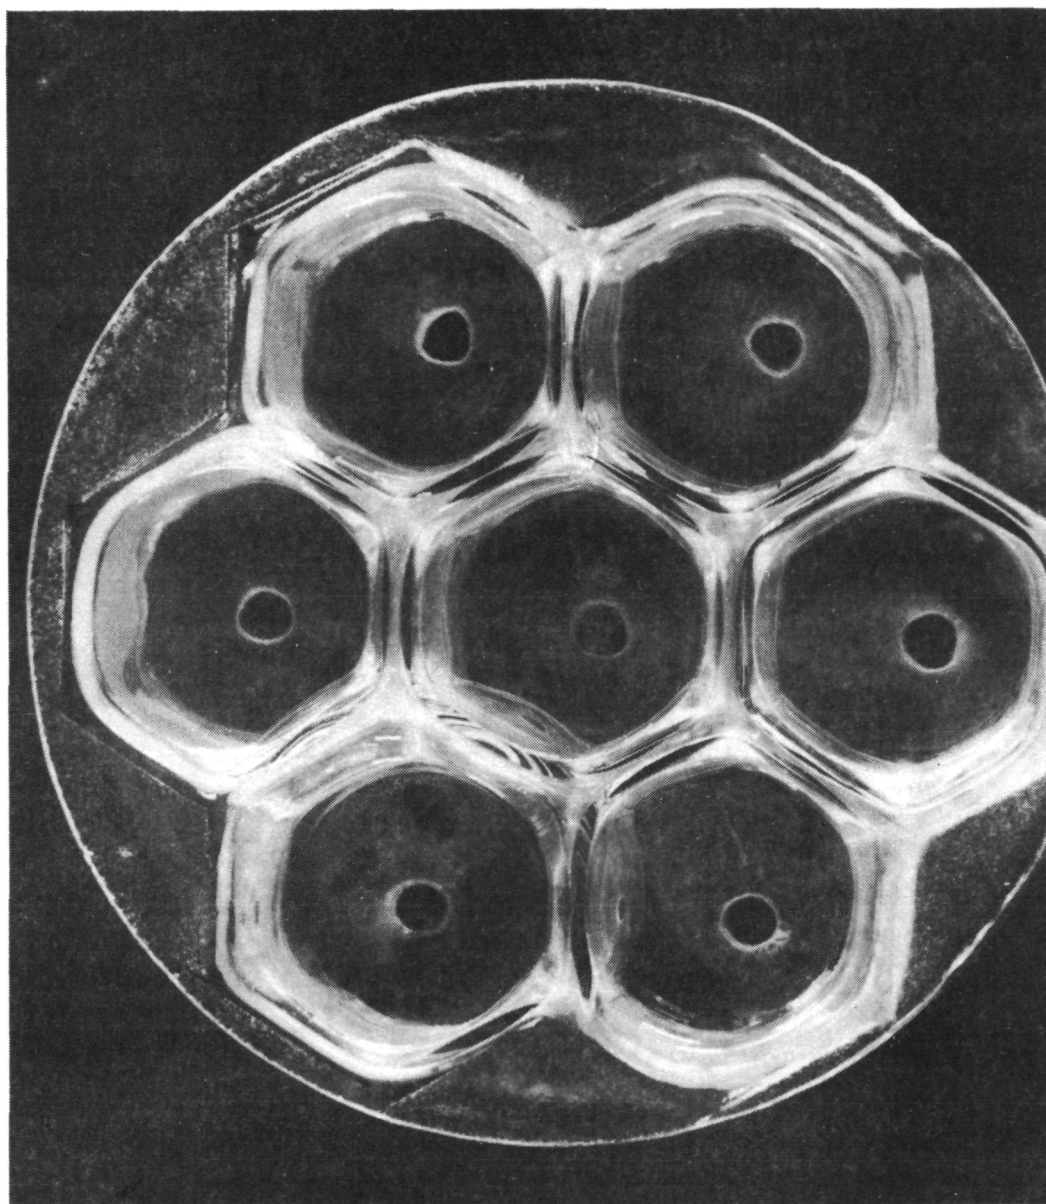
Welded Vycor Glass Mirror 15-cm Diameter.
